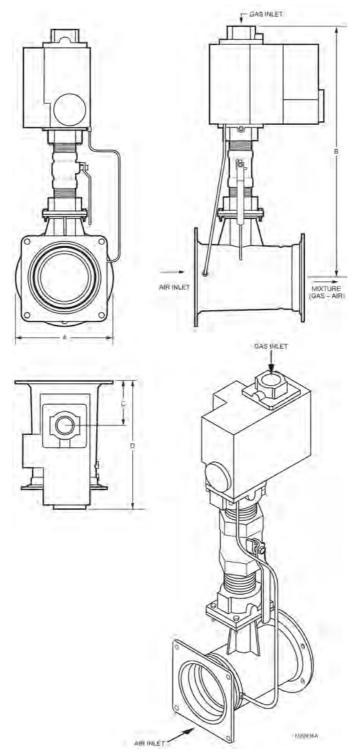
Venturi 150-335 kW, with 1/2 in. to 1 in. gas valves and valve shutoff kit installed dimensions in in. (mm). See Table 3 for dimensions
